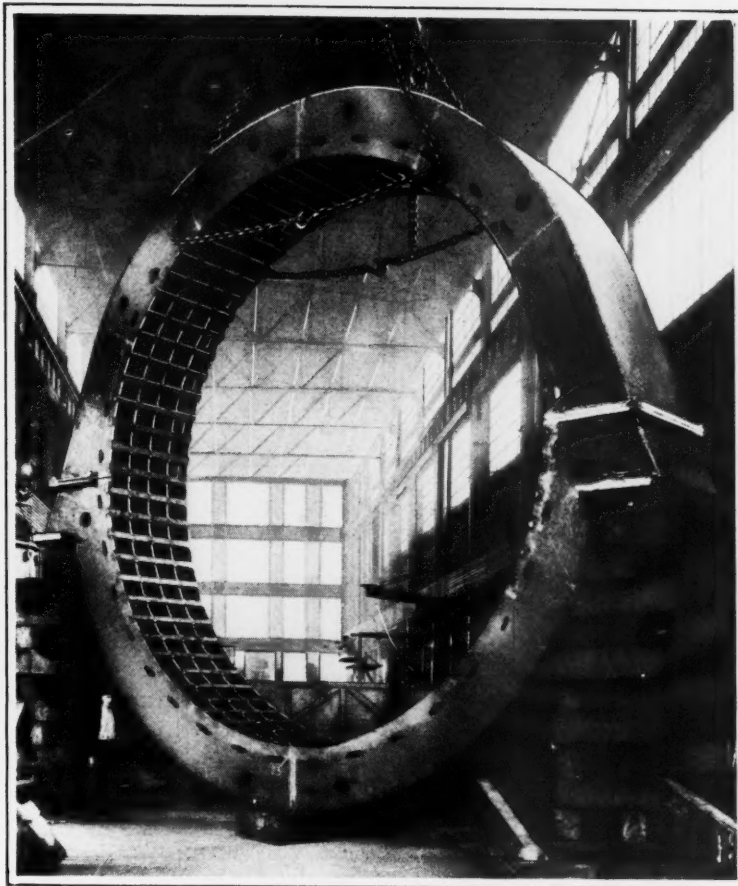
Yoke for 25,000-KVA Generator Assembled by Welding Together Pieces of Plate Steel Cut to the Required Dimensions
